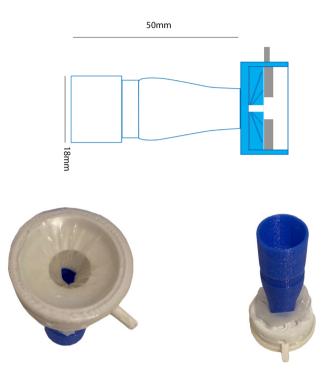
First nozzle design with elastic layer to prevent clay leak into the small parts
